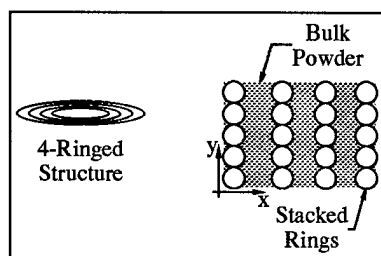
Detail of thermal wall construction for the extensive in-bed structure[3].
